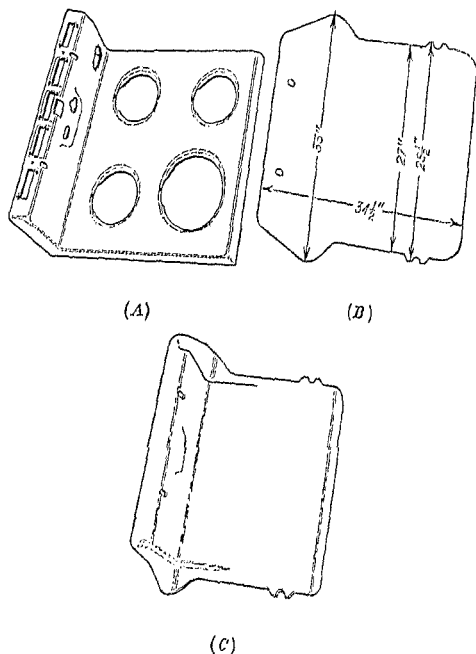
One-piece electric-range top and backsplasher: (A) finished part; (B) blank; (C) part after first forming operation. (General Electric Co.)
